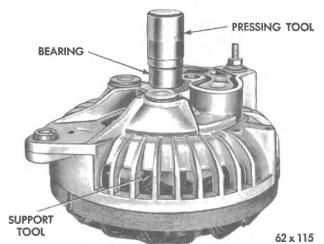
Installing rectifier end shield bearing (Tool CA-3770).
